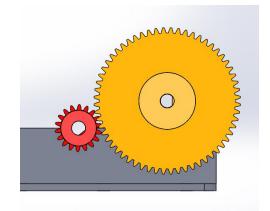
Mark 2 gearbox: motor gear (red) with 20 teeth and driver gear (orange) with 60 teeth.
